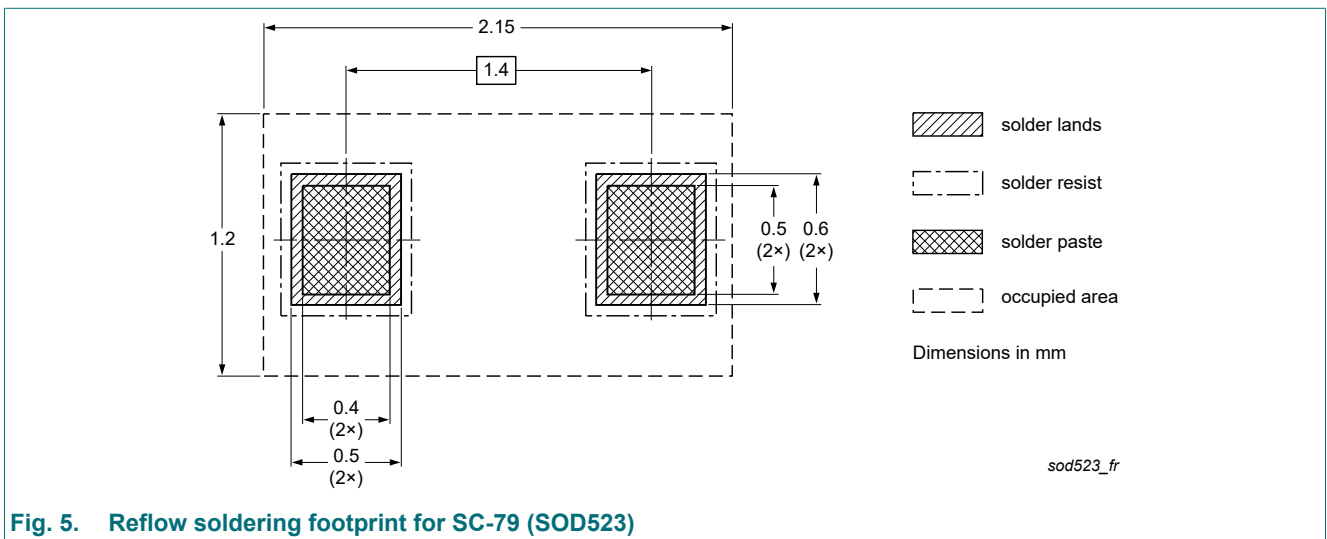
Reflow soldering footprint for SC-79 (SOD523)
